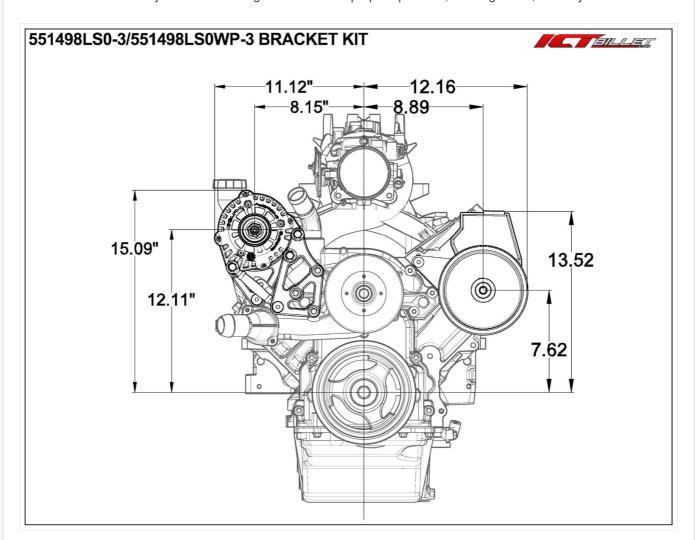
Technical drawing providing key dimensions of the bracket kit when installed, useful for clearance checks and custom applications.
